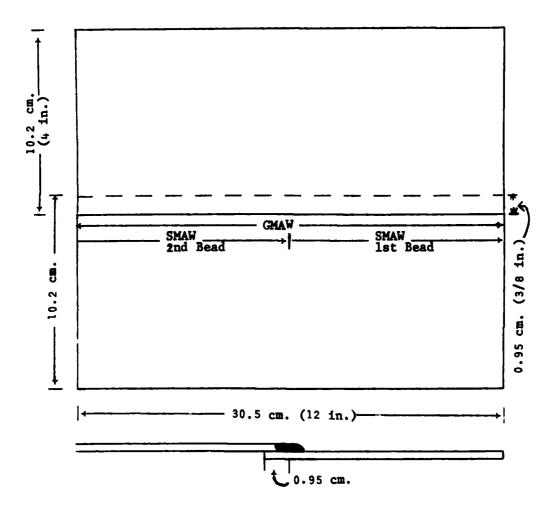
Gas-Metal and Shielded-Metal Arc Welded Panels - Galvanized Steel
